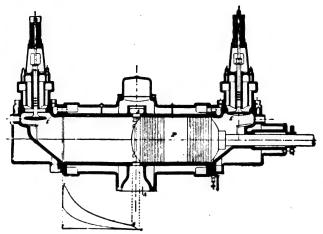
Side Section through Körting Gas Engine. Mather and Platt.
